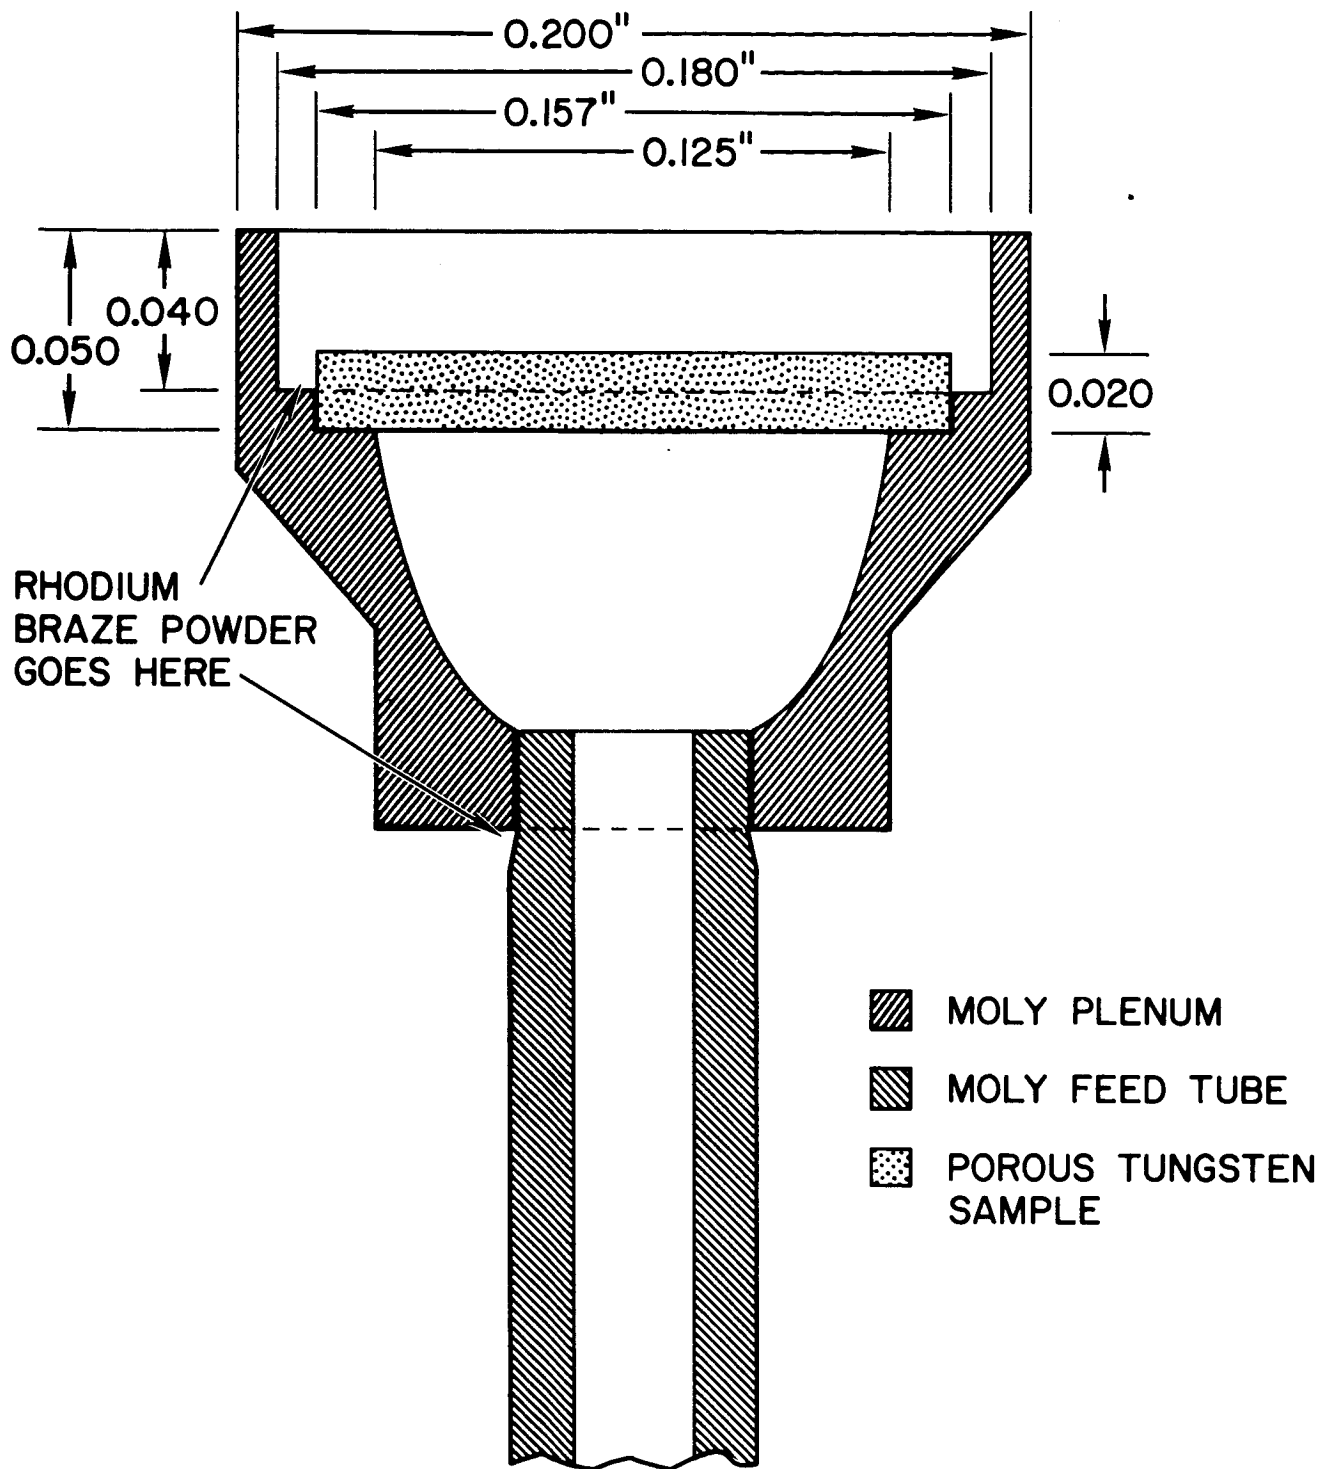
Cross section of sample sitting in a molybdenum plenum ready for brazing.
